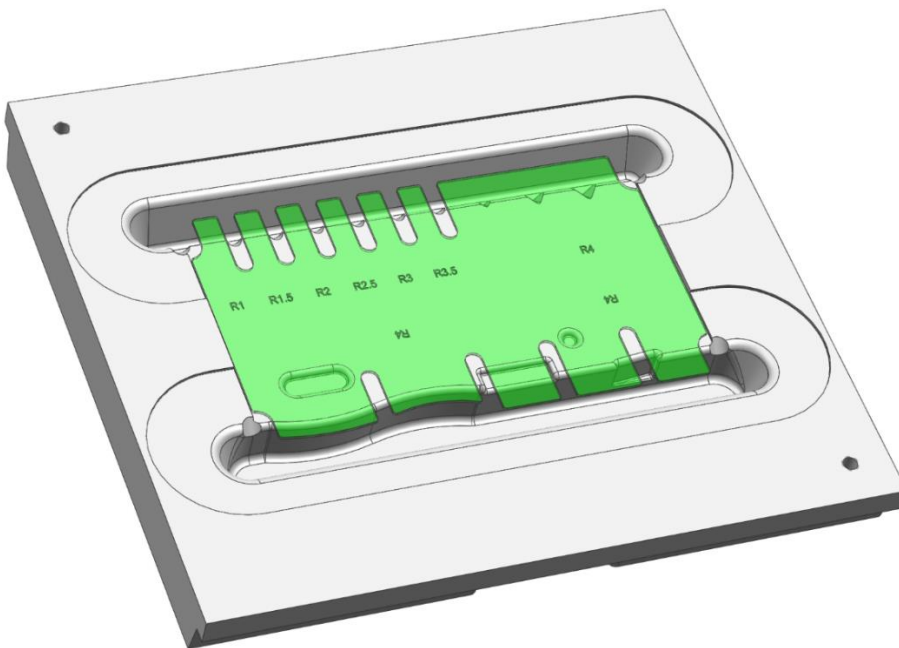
Tool for testing several aspects of forming, radii, stretch-flanges, shrink-flanges, dimples and joggles. Tool size 450x500 mm.
